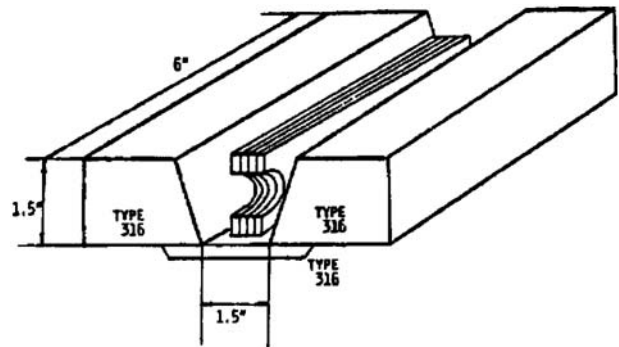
A schematic drawing of a groove weld deposited with three different N containing electrodes (SMAW) from which Varestraint samples were extracted.
